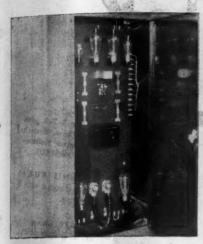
The control panel for a large resistance welder is sometimes mounted within the machine frame.
